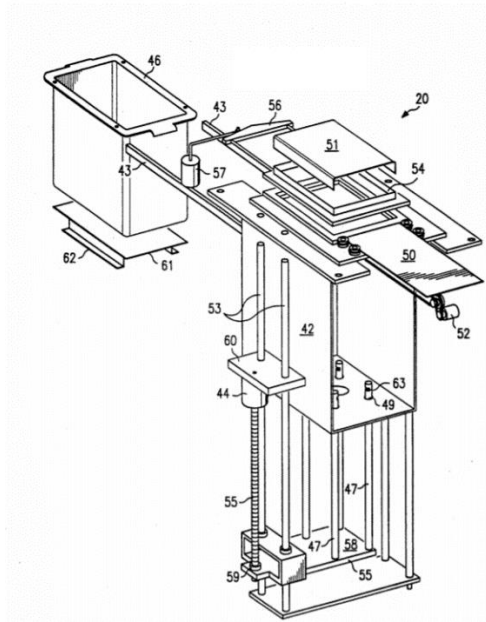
Exploded view diagram of the dual piston powder delivery system of a selective laser melting print [30].
